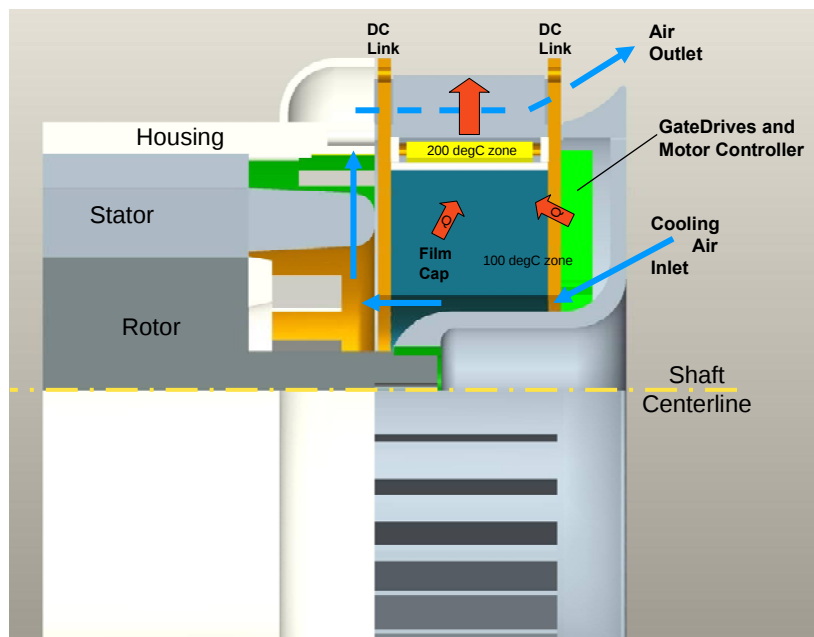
Motor concept section view showing detail of component arrangement and proposed heat flow path.
